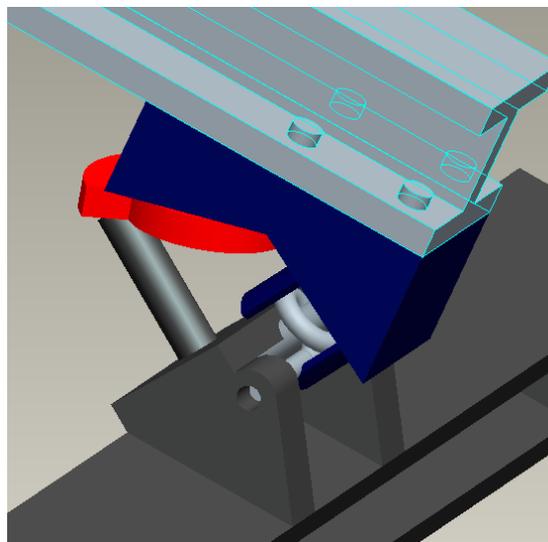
Purposed configuration for steering device-to-beam-and rear-axle assembly
